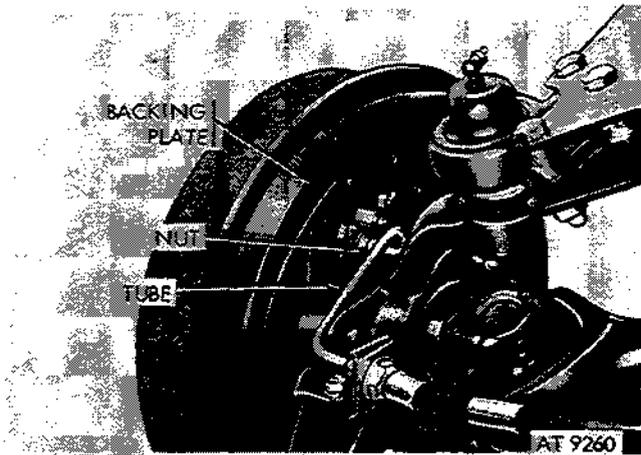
Disconnect brake cylinder tube from brake backing plate.
